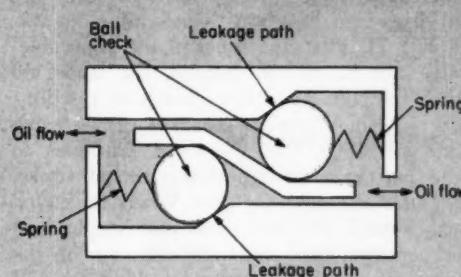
Stabilizing valve consisting of check and throttle valves in one housing
